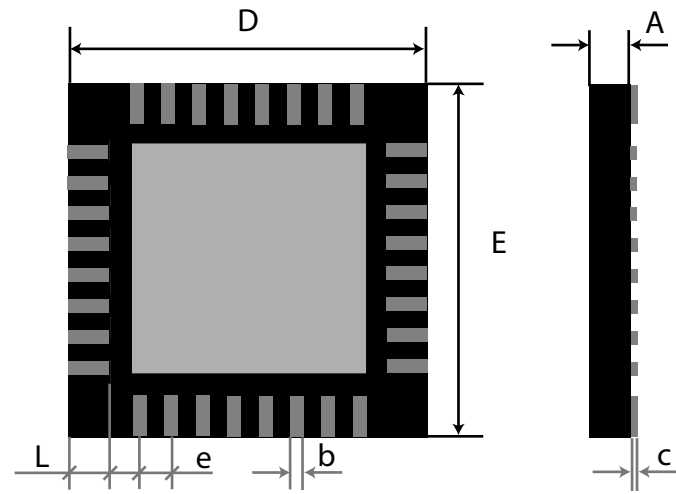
36-pin QFN Package Dimensions (viewed from bottom)
